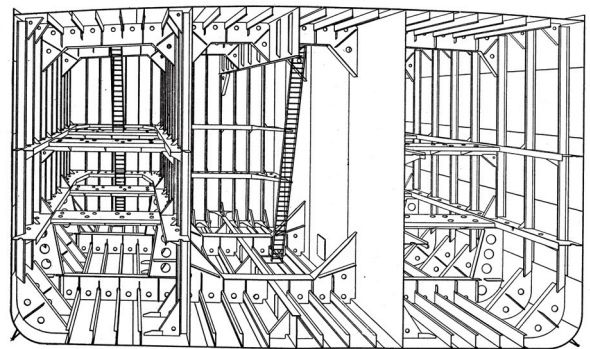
Welding technology, although developed in the 1900s, became more widely used in the 1930s, especially for tankers. Making really oil tight riveting was difficult, so it was no surprise that they were the first ship type to make wide use of welding. In Second World War, welding was used for American mass production of Liberty cargo ships. Full scale structural tests were made on welded and riveted ships in Britain; the cross section
